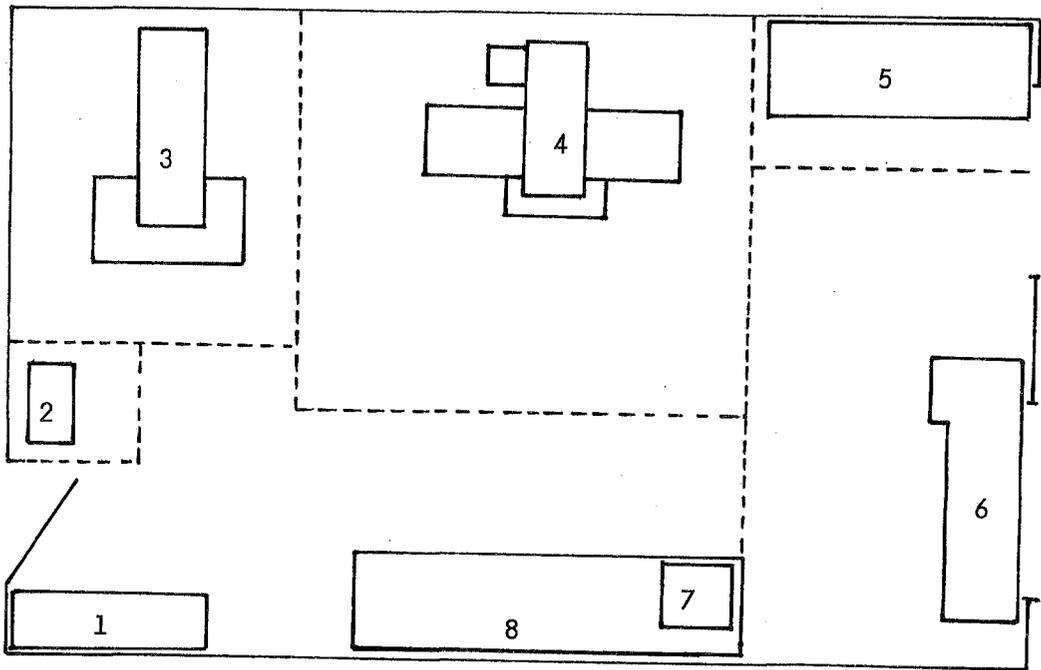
Workshop equipment layout: 1 - cabinet for overalls; 2 - floor tool-grinder; 3 - shaping machine; 4 - milling machine; 5 - cabinet for accessories and tools; 6 - turning lathe; 7 - bench-top drill; 8 - work bench
